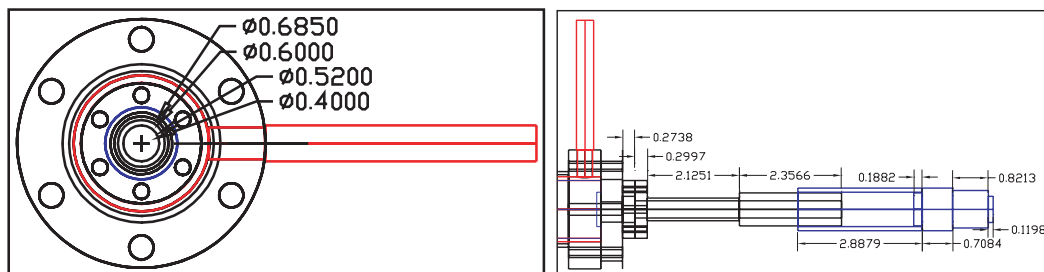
CAD Drawing of the Microscope Objective Detector: Dimensions. (All dimensions are indicated in inch.)
